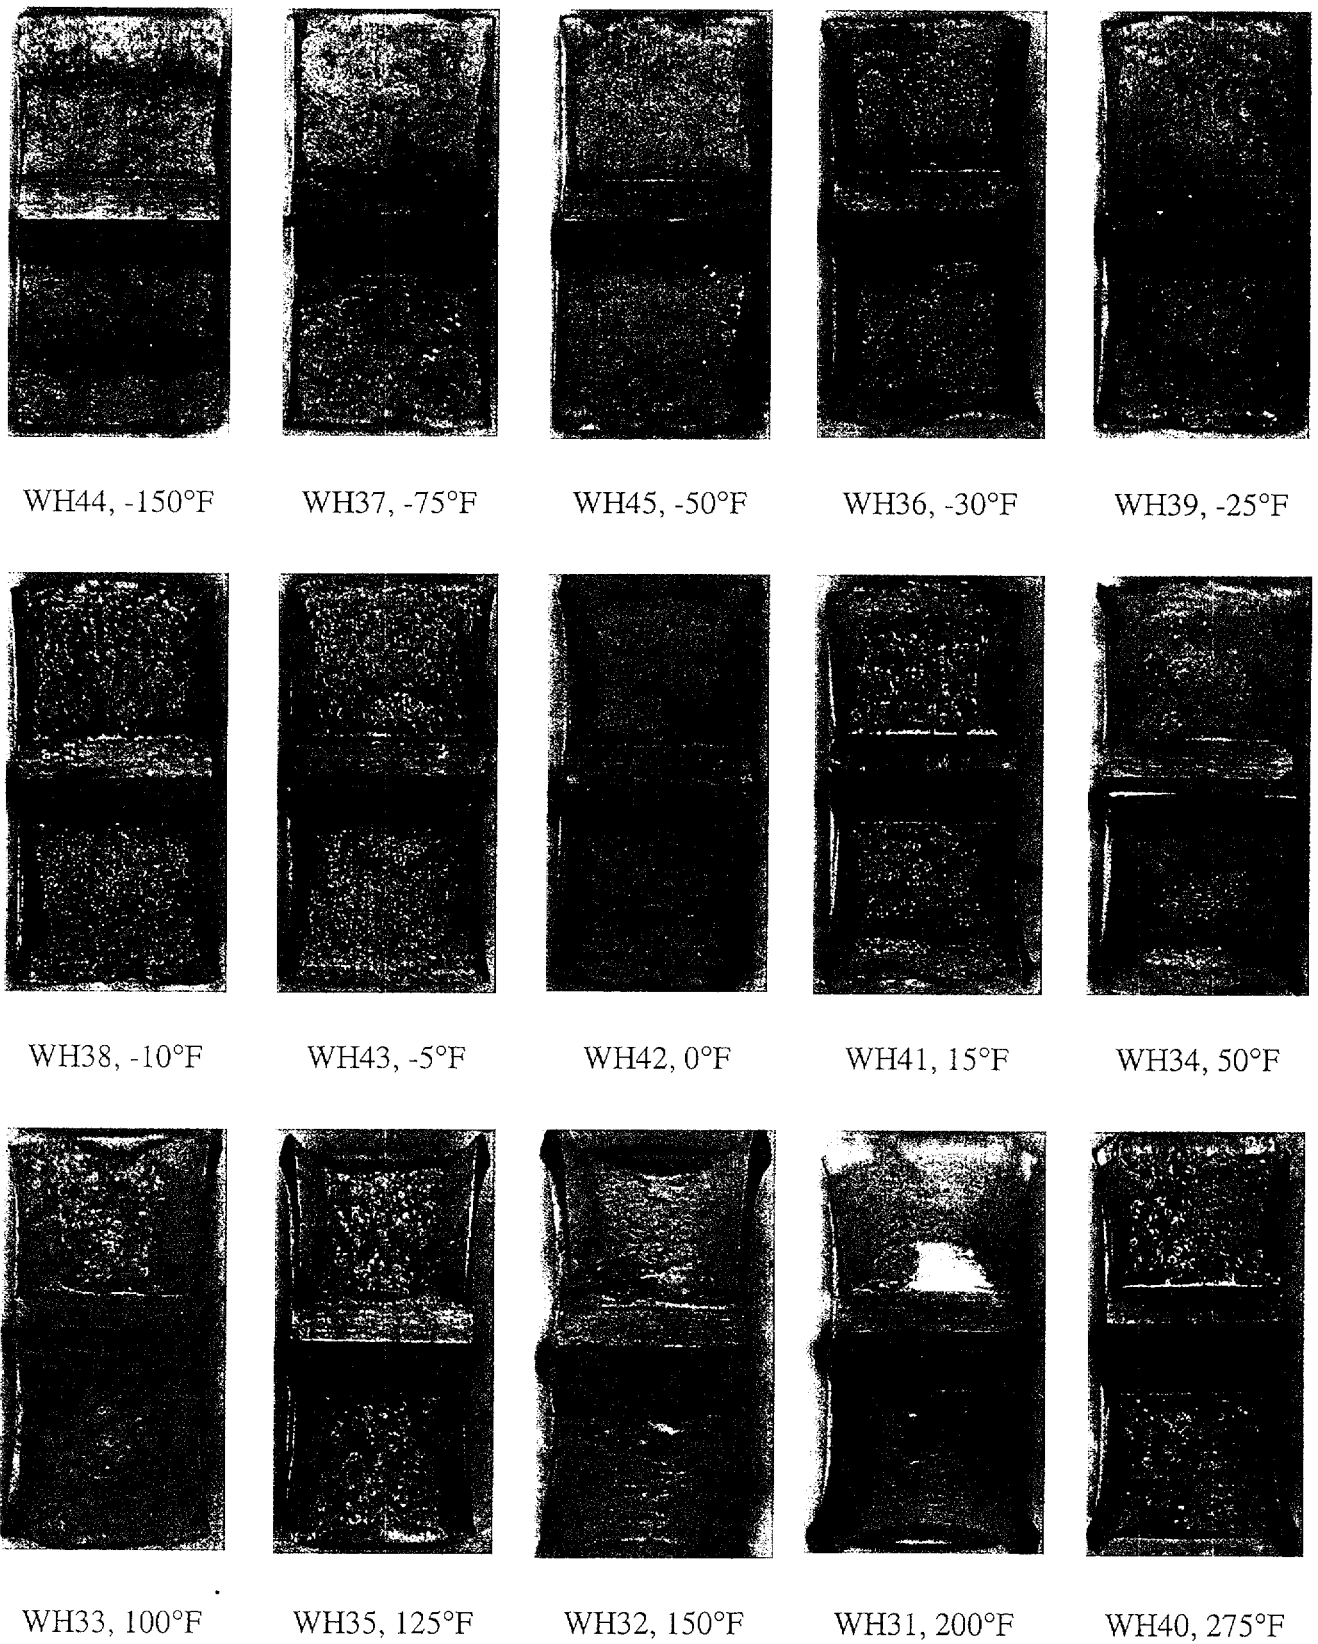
Charpy Impact Specimen Fracture Surfaces for Beaver Valley Unit 2 Reactor Vessel Heat-Affected-Zone Metal
